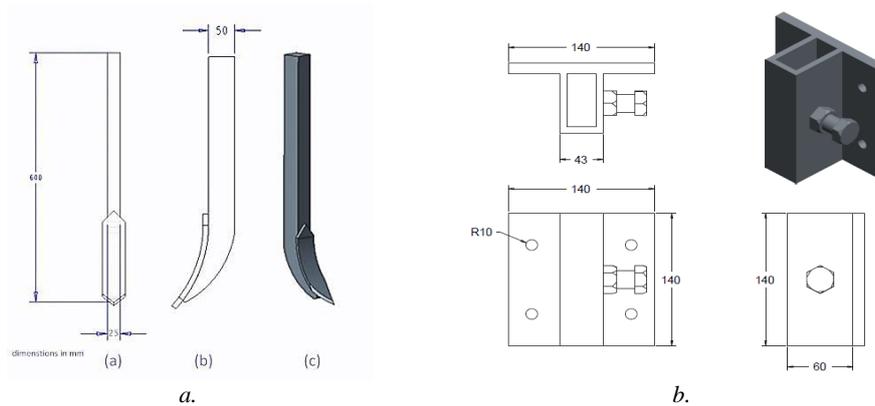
a. Detailed drawing of cultivator tine; (a) front view (b) side view (c) perspective view
